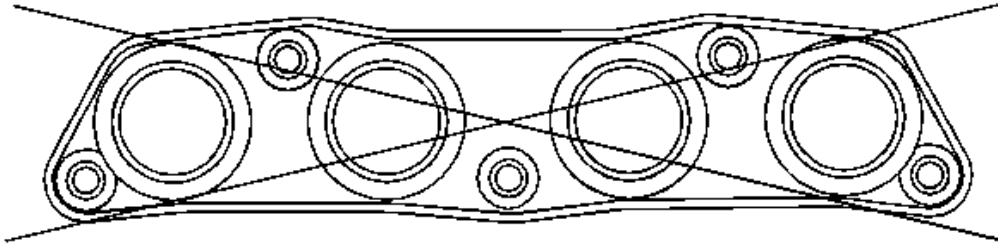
Inspecting Exhaust Manifold For Warpage
